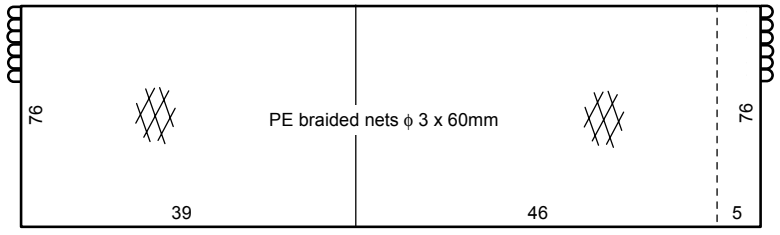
Schematic shape and technical drawing of the SF type jellyfish separator system.
